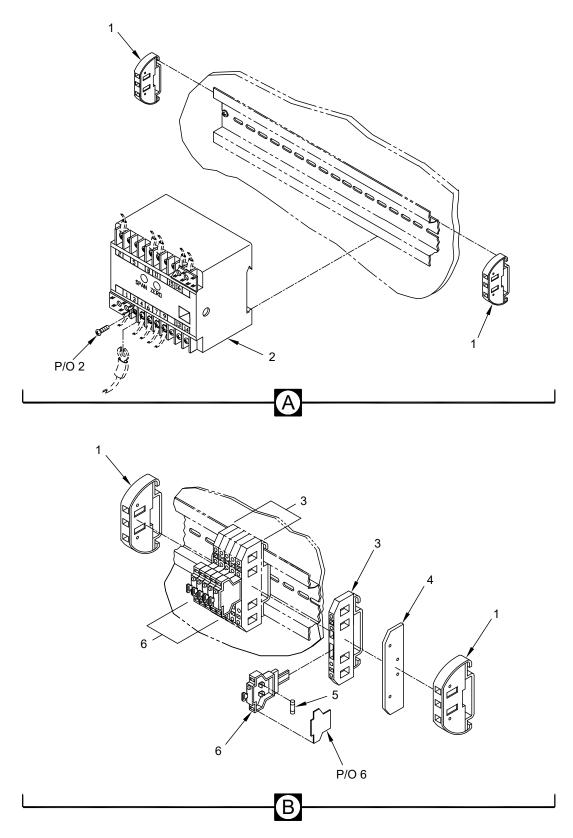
Barrier Panel Assembly (Sheet 2 of 7).
